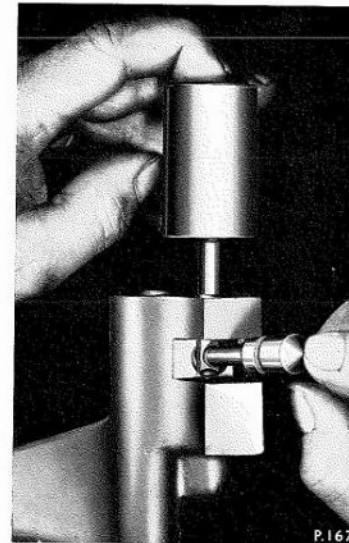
Re-assembling the reverse stop plunger to the reverse selector fork using Churchill Tool R.G.81
